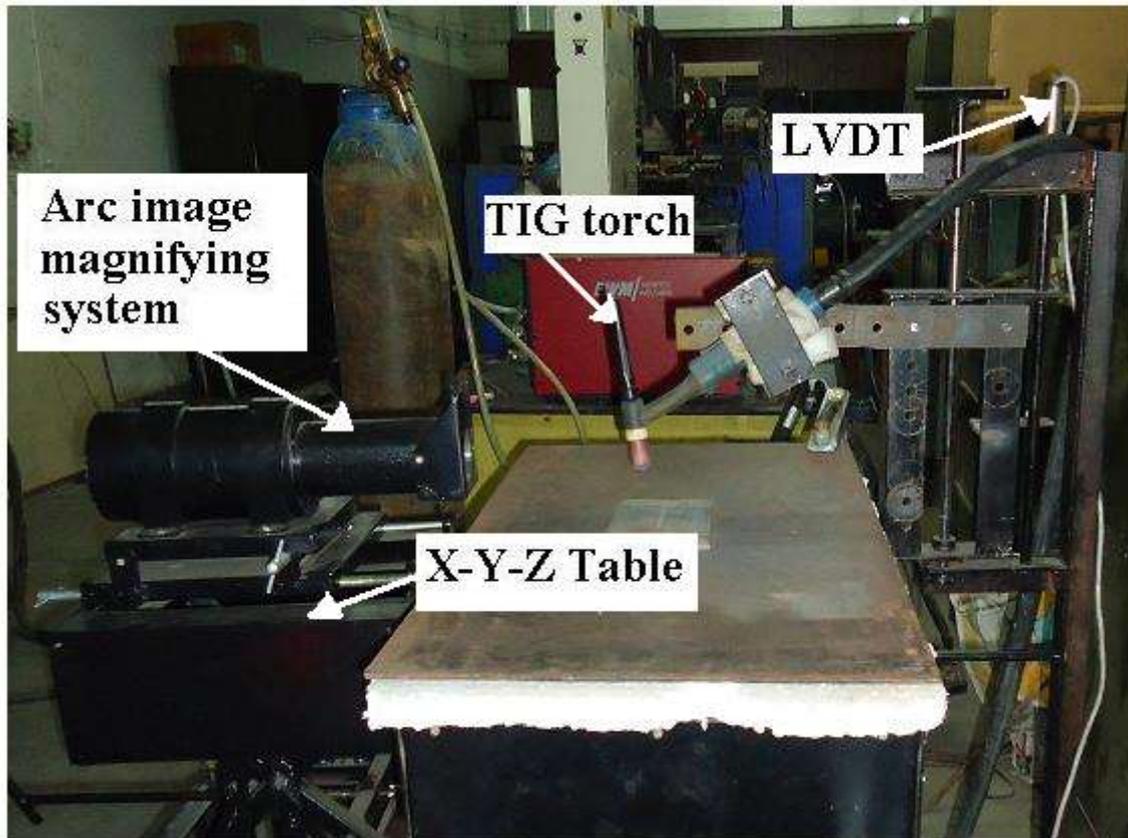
Experimental set-up of TIG welding with arc image magnifying system
